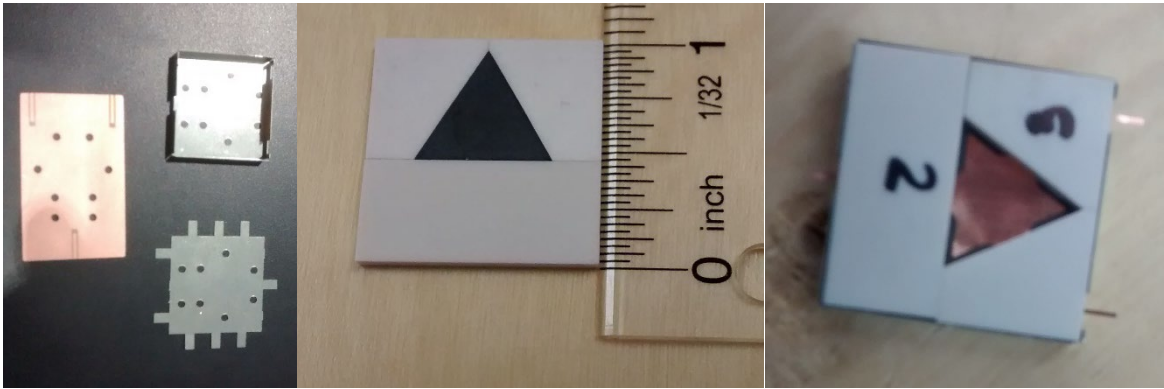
Testing board and enclosure pieces of the circulator (with vias) before assembly (left). Dielectric and ferrite blocks of one layer (middle). Circulator (no vias) in mid-assembly, with the bottom layer completed and the top layer dielectric inserted (right).
